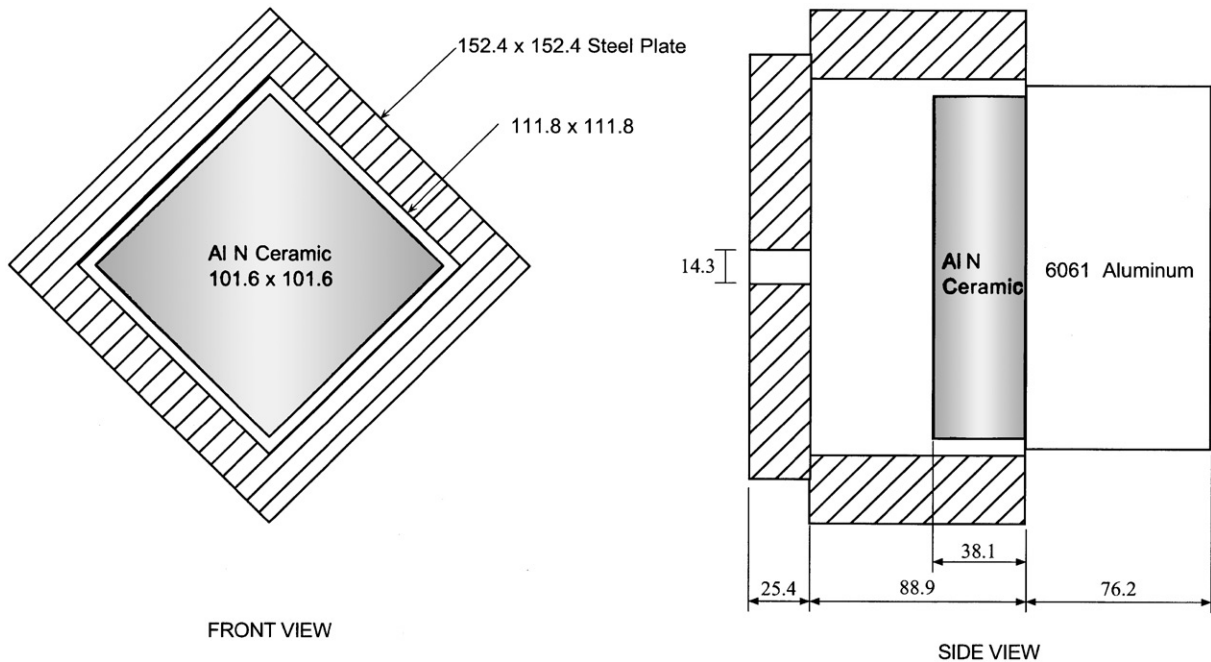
Schematic representation of the target design. Mechanical separation of the penetrator from sabot is obtained using a mild steel frame with a cover plate. All dimensions are in mm.
